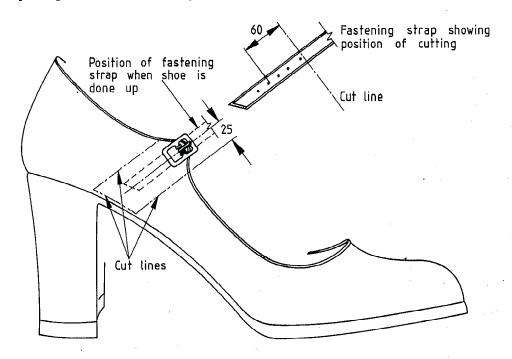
/1a. Buckle attached directly to a closed-in quarter (Upper marked for the cutting of a type A test piece. Position of cutting of fastening strap also shown.)
